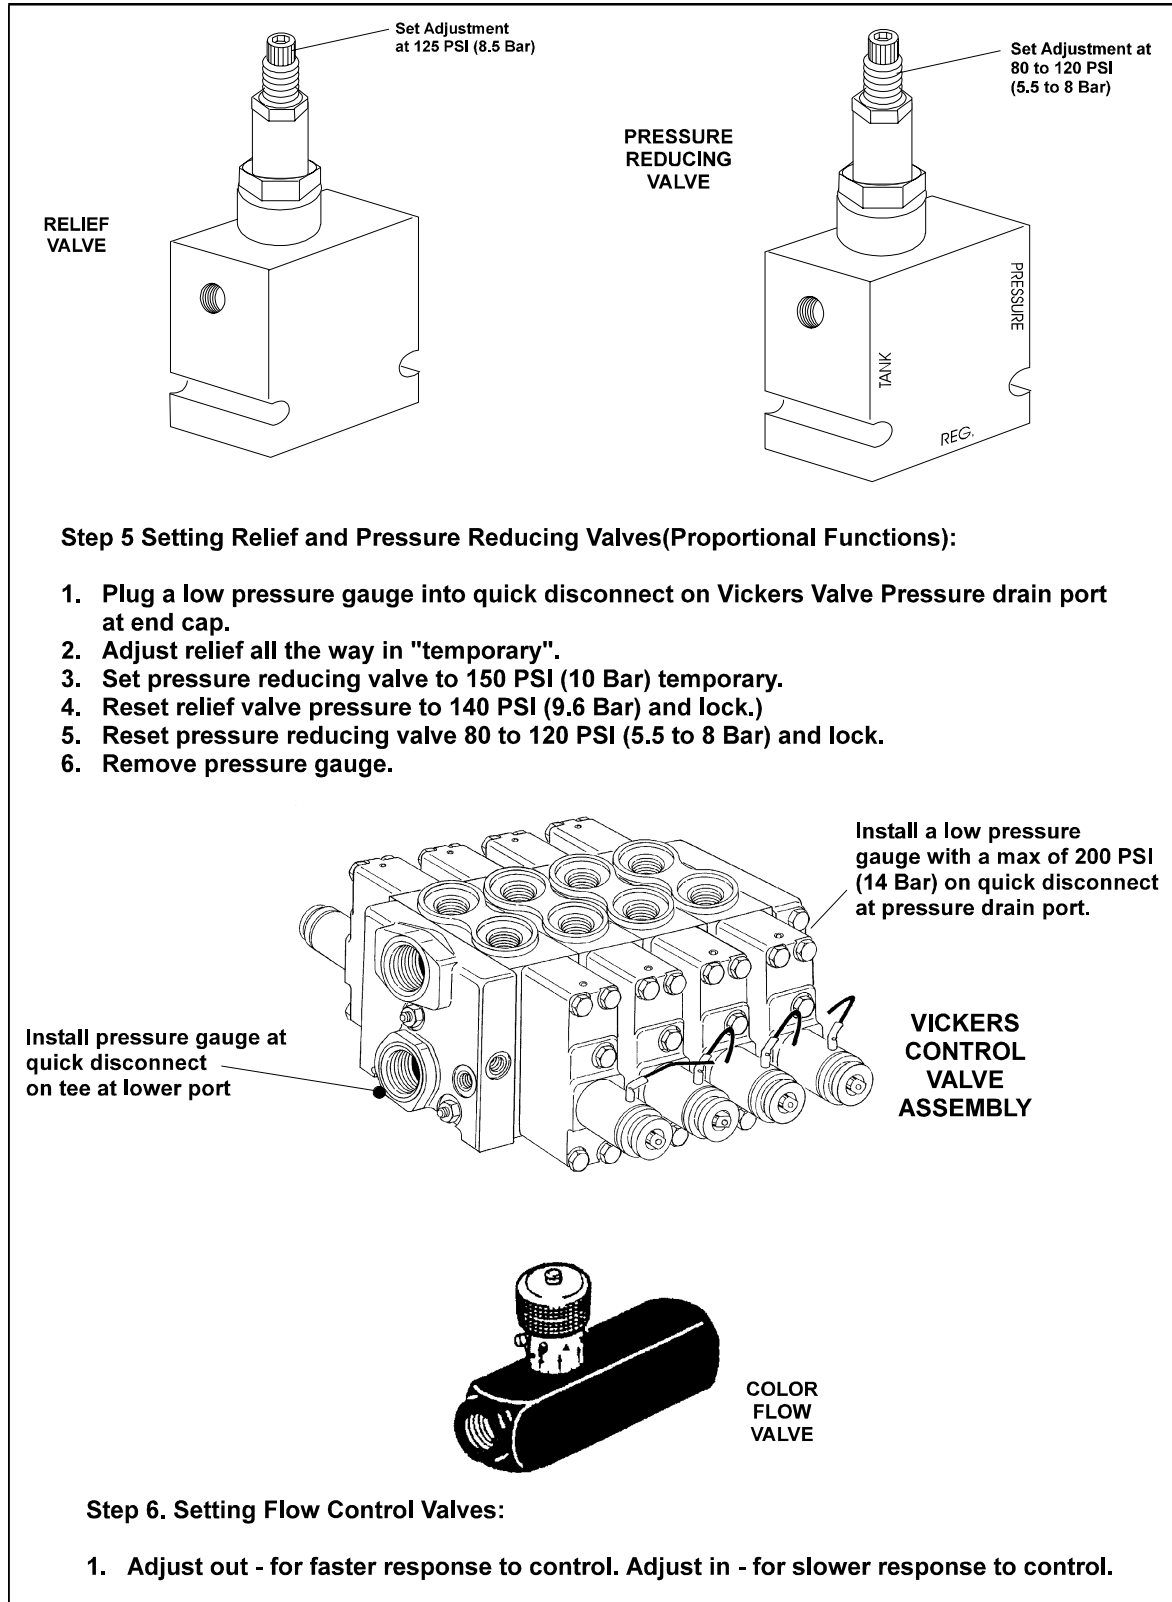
Pressure Setting - All Hydraulic Machines (Sheet 4 of 4)
